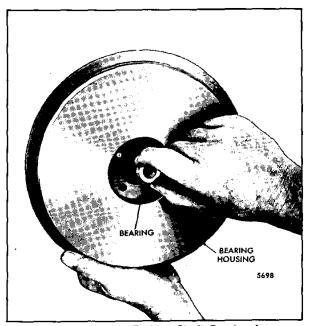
Removing Turbine Shaft Bearing from Bearing Housing
